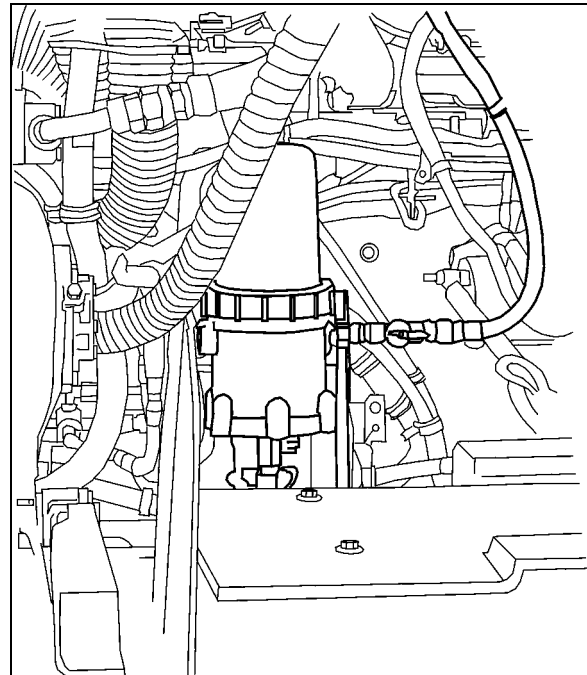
DAVCO FUEL PRO 382 FUEL FILTER 03032
